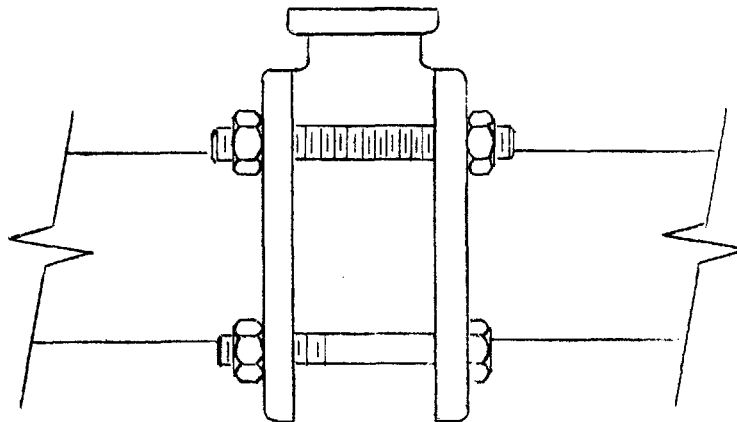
FLANGELESS, BOLTING OPTIONS
